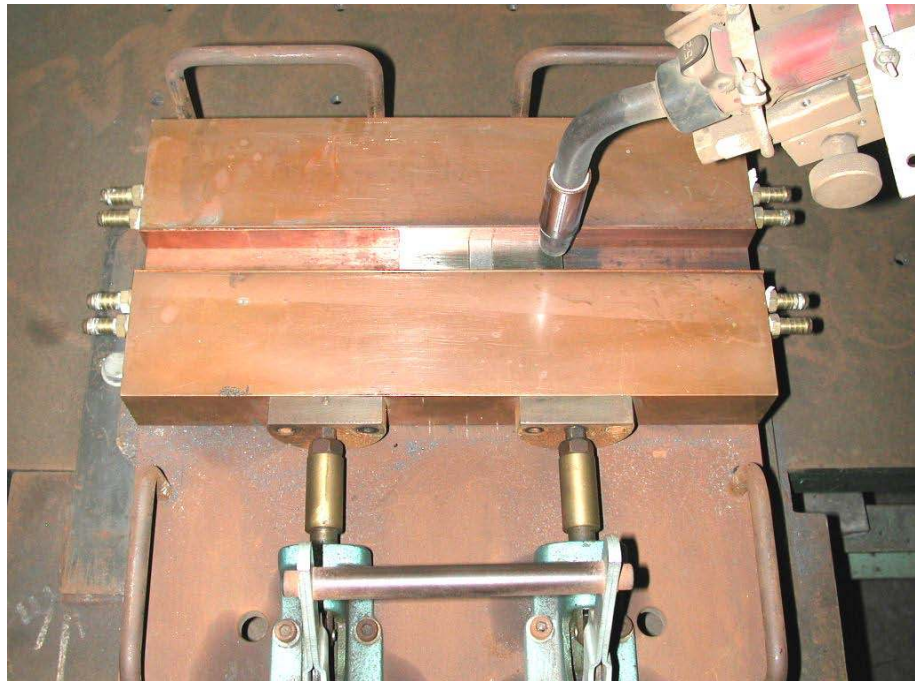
6 Photograph showing general view of the large welding fixture used and the test piece assembly ready for welding.
